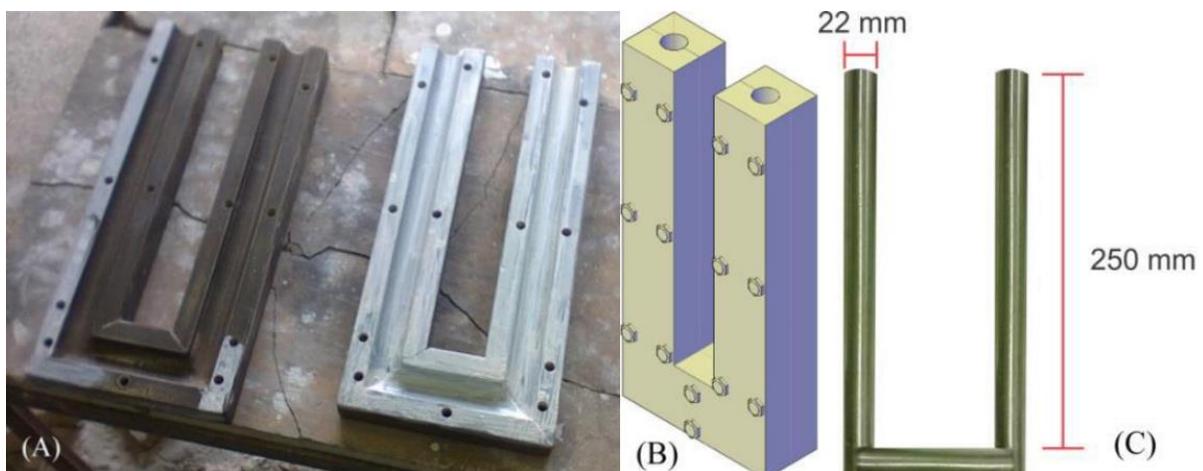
U-shaped ingot. (A) Open ingot; (B) Schematic drawing of the mold U; (C) Test piece with dimensions. Source: Cardoso, 2017.
